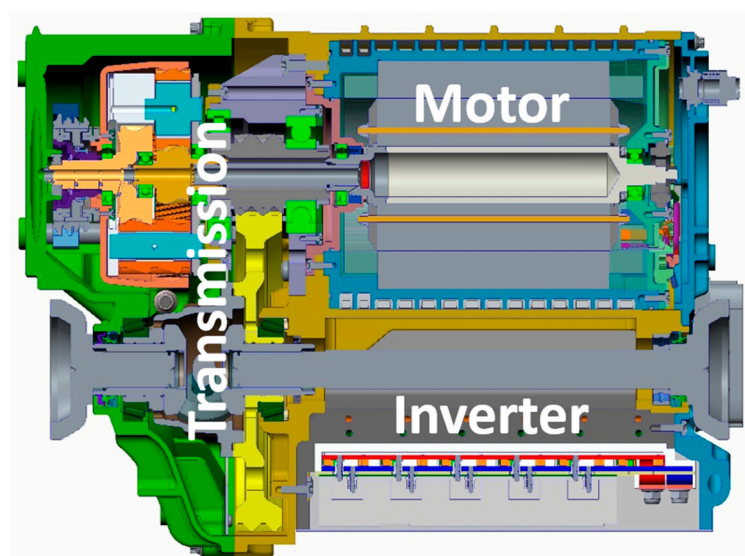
Cross section of chosen layout and arrangement of components in the housing.
